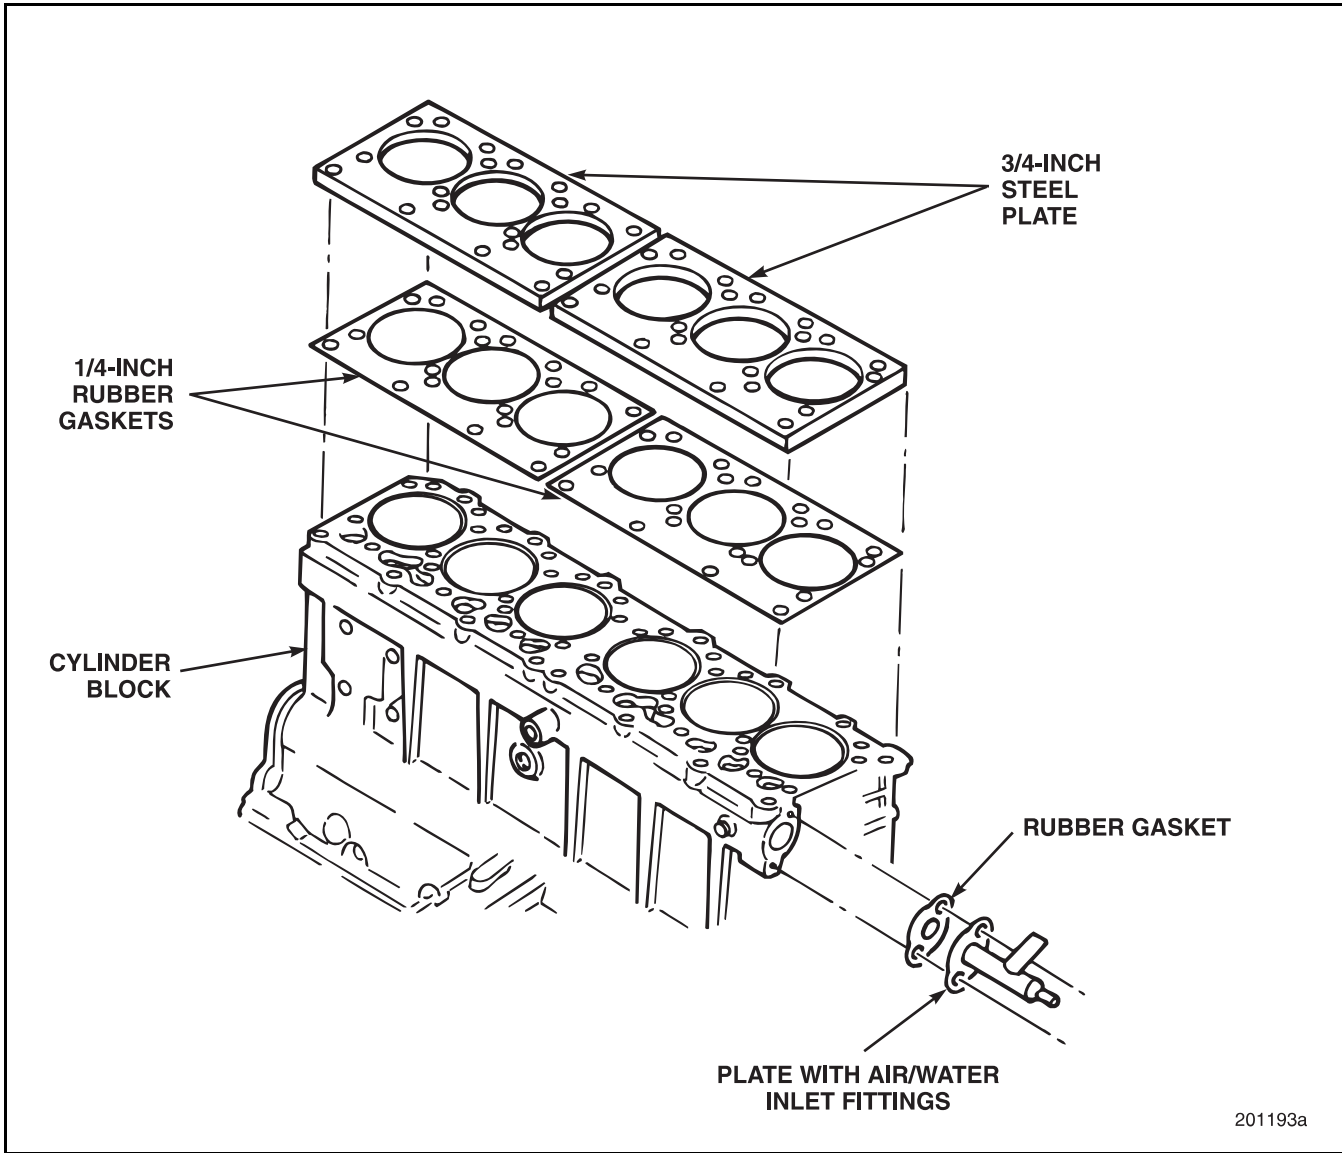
Cylinder Block Coolant Passage Leak Check (Out of Chassis)
